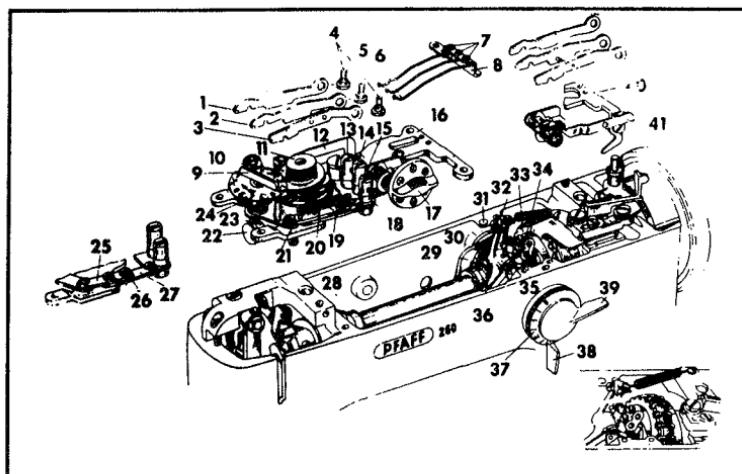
This figure is indispensable when used in conjunction with the text, in adjusting the engaging levers on Models 260, 262, 360 and 362.
